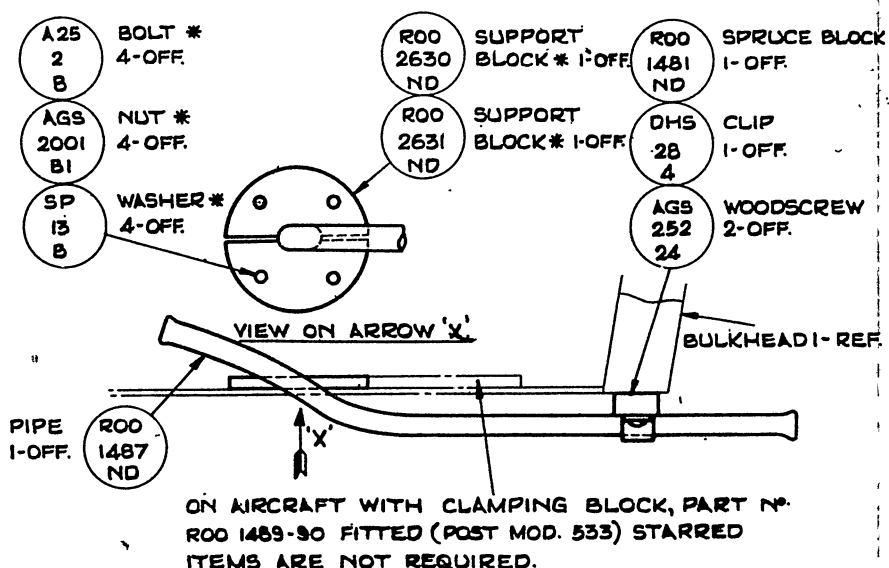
DETAIL 'C'-(REFER TO SHEET 1)-APPLICABLE ONLY TO AIRCRAFT NOT EMBODYING PROVISION FOR TOTAL HEAD AIRLINE.
